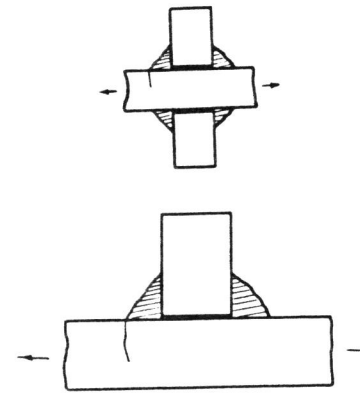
Transverse non-load-carrying fillet welds (crack initiation at the weld toe).
